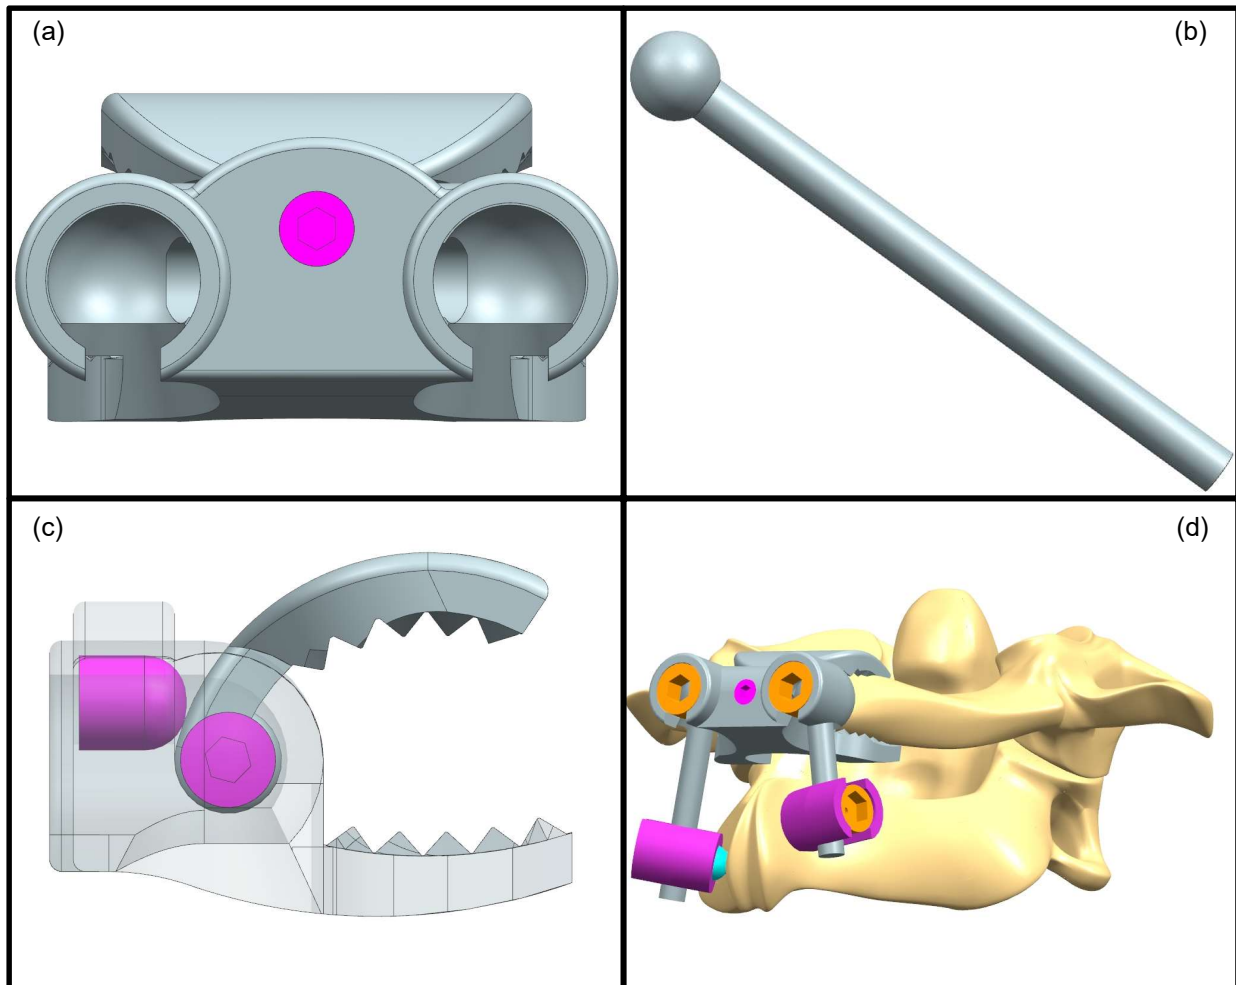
a) Posterior view of C1 clamp showing new socket design, b) 3.5mm polyaxial rod, c) detail to illustrate new cam locking mechanism and d) full construct utilizing C2 translaminar screws
